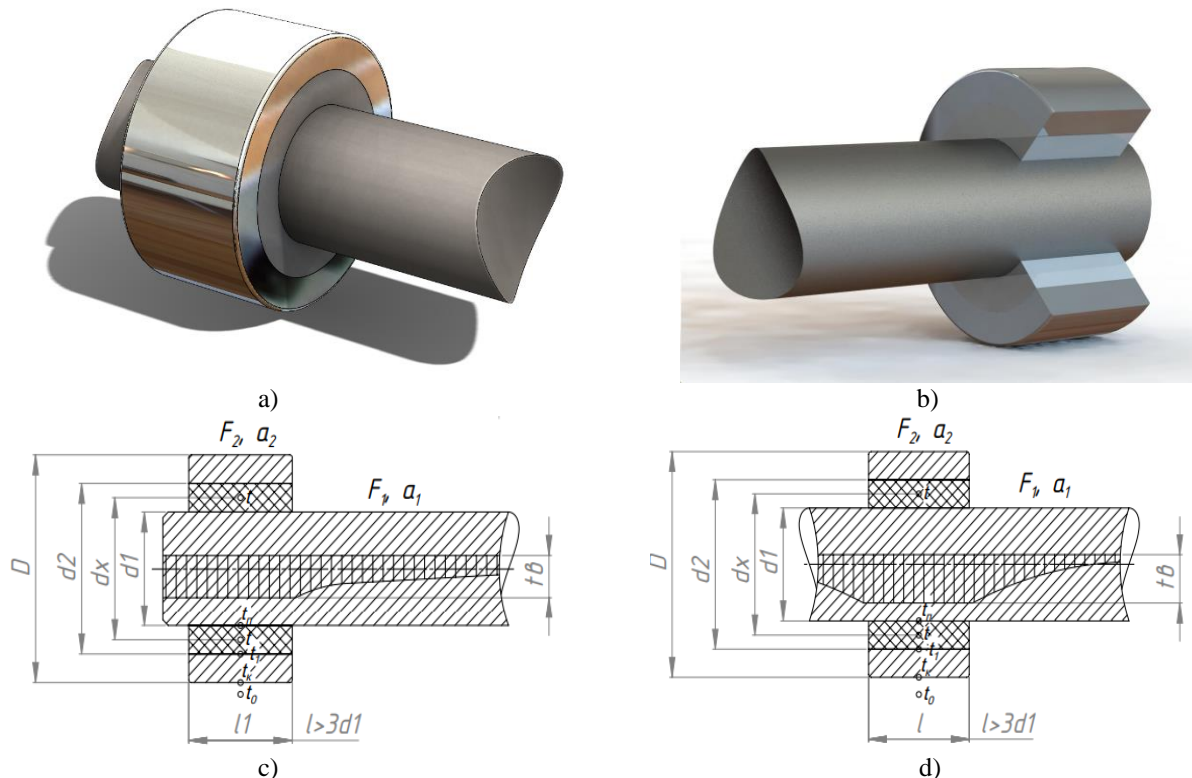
Diagram of the bearing unit filled polymer: a, b – bearing units modelled using DS SolidWorks 2020; c - end bearing; d - median bearing; d_1 - shaft diameter in the friction zone; d_2 - outer diameter of bearing; D - outer bearing housing diameter; l - bearing length; L - length of shaft with intense heat exchange, t_b - temperature distribution at shaft operation.
